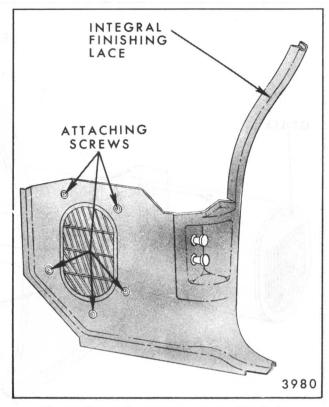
Shroud Side Finishing Panel - "F" Styles
